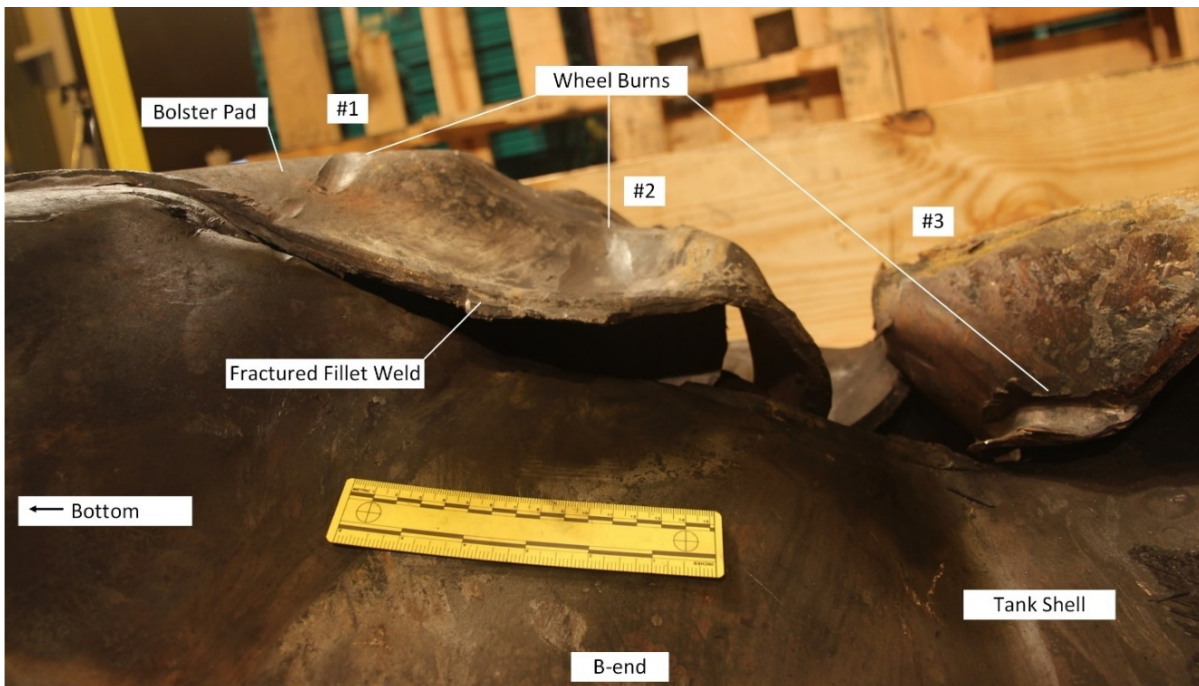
UTLX 209403 shell plate coupon side view showing three gouges, or wheel burns in the bolster pad. Wheel burn #3 was situated next to the origin of the shell fracture.
